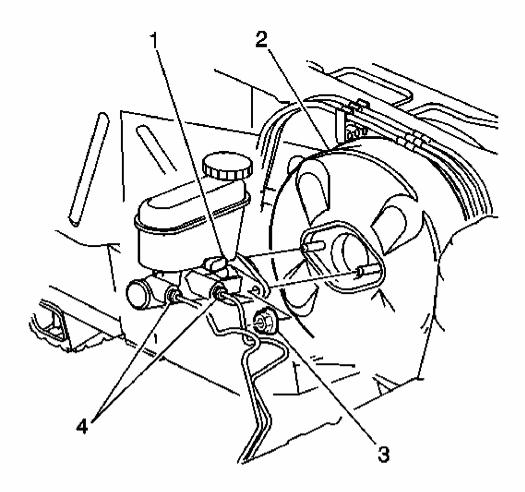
Removing/Installing Master Cylinder Courtesy of GENERAL MOTORS CORP.
